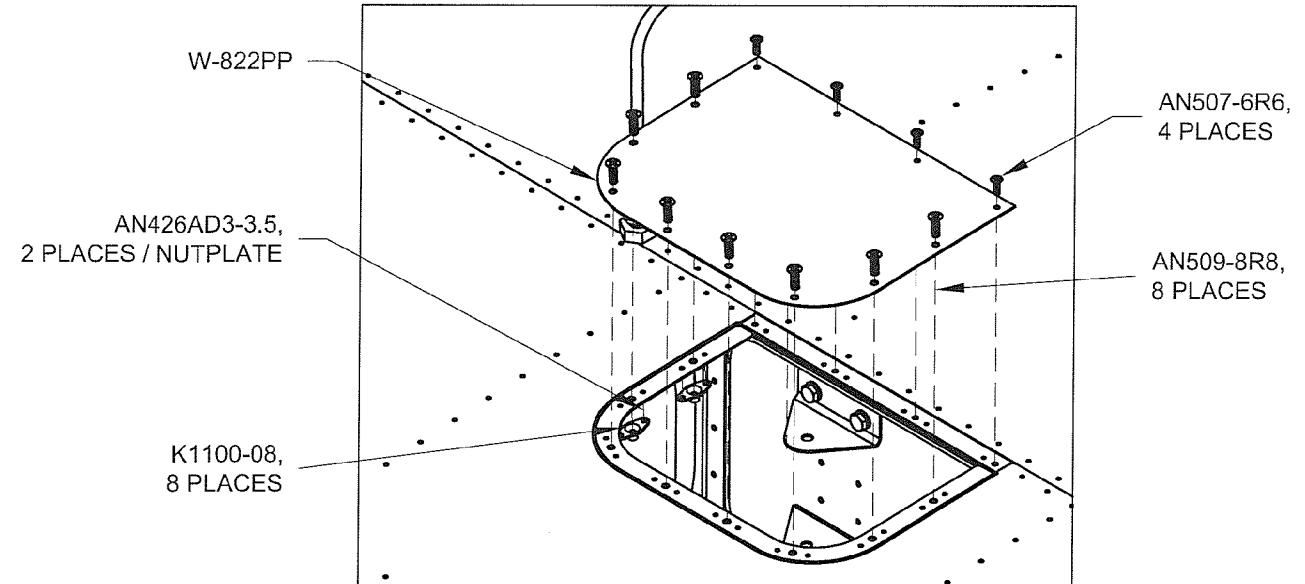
TYPICAL WING ACCESS PLATE ATTACH
